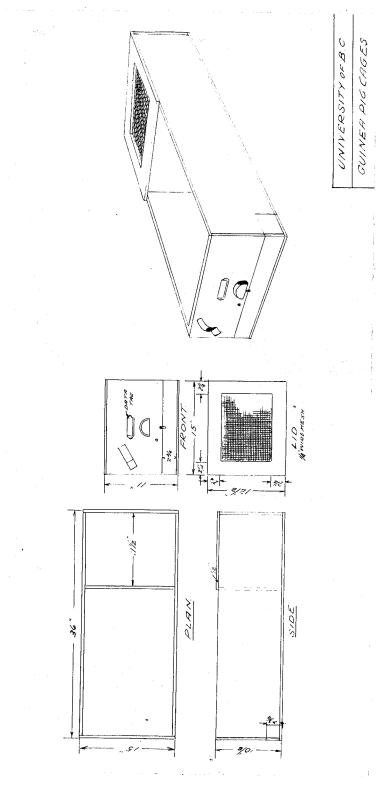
Scale drawing showing specifications of guinea pig cage.
